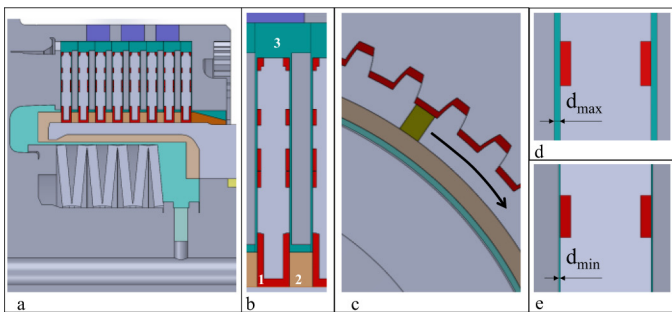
(a) Multicomponent domain for the simulation of the open configuration; (b) Modular approach, single reference unit; (c) tooth leakage due to gear and friction plate engagement; (d) open configuration; (e) closed configuration
